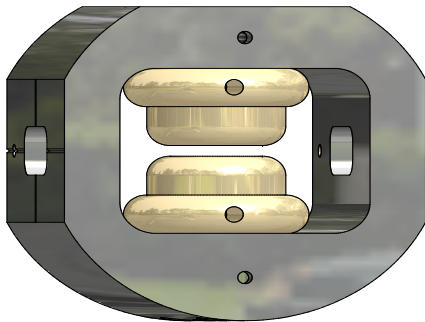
Engineering drawing of the copper electrodes in their macor holder.
